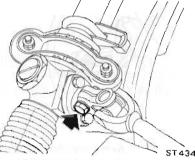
Loosening nut securing lower joint to pinion gear
